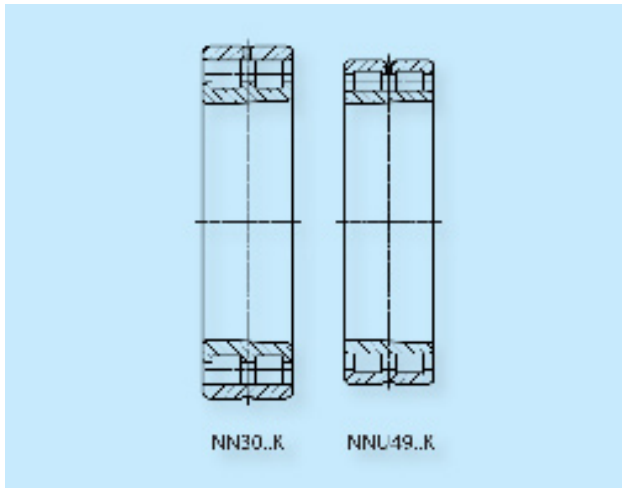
Series of high-precision double row cylindrical roller bearings
